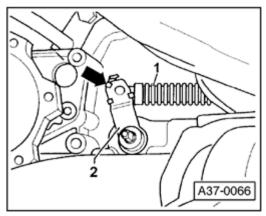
Pressing Ball Socket Of Selector Lever Cable From Selector Shaft Lever & Removing Bracket On Transmission
